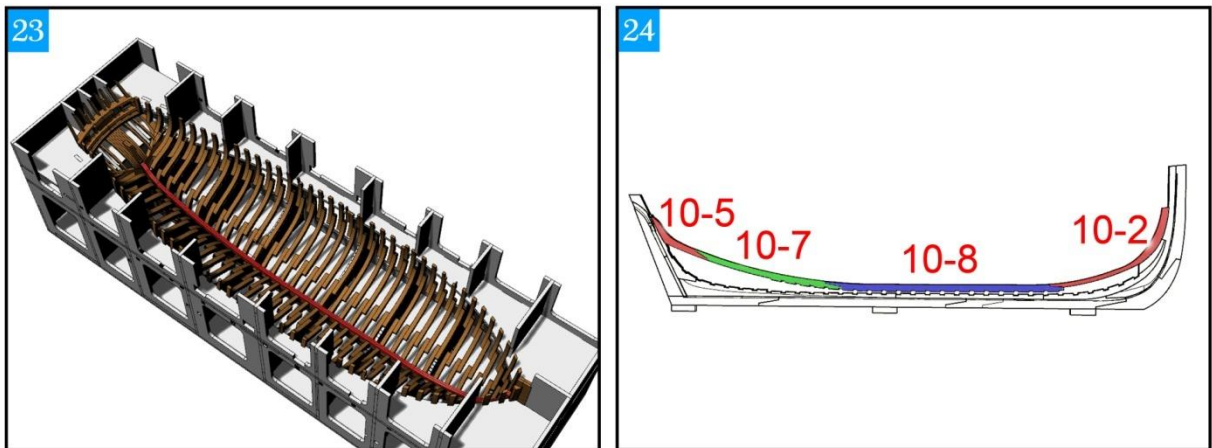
24. The keelson is installed next and is shown on drawing (6–3).
